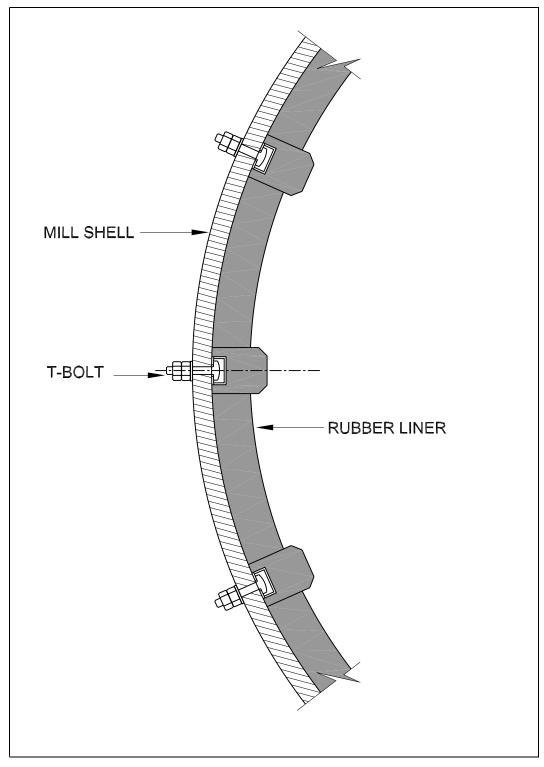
Typical Shell Plate Liner and Lifter Bar Arrangement
